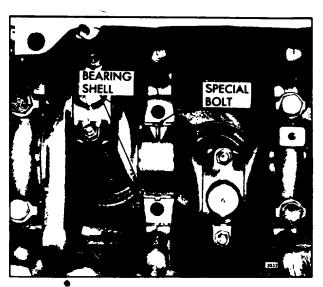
Removing Main Bearing Upper Shell (Except Rear Main) Crankshaft in Place
